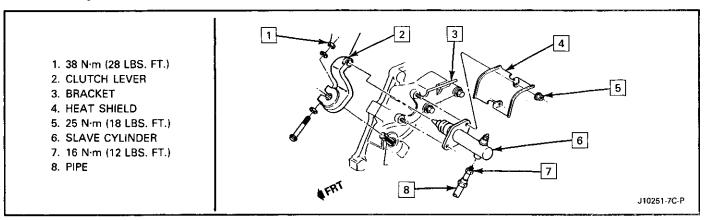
Clutch Slave Cylinder & Clutch Lever Mounting
